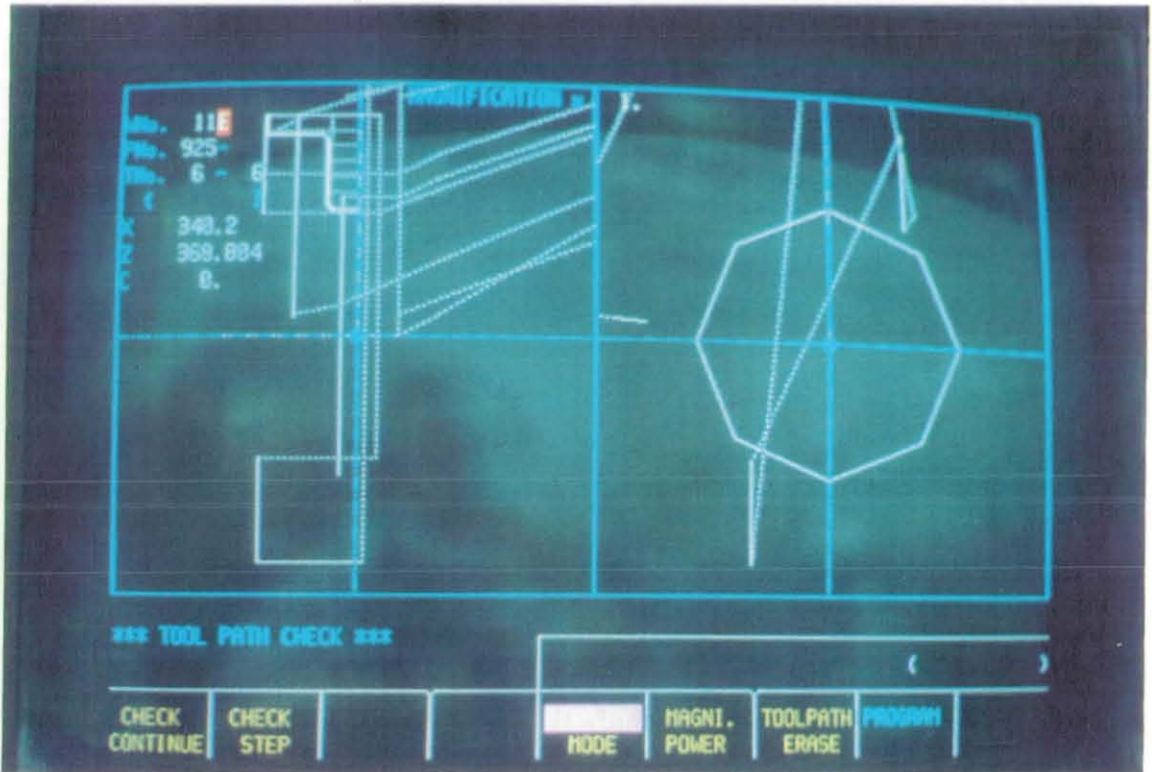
TOOLPATH FOR COMPONENT B	LUT- CAD/CAM
